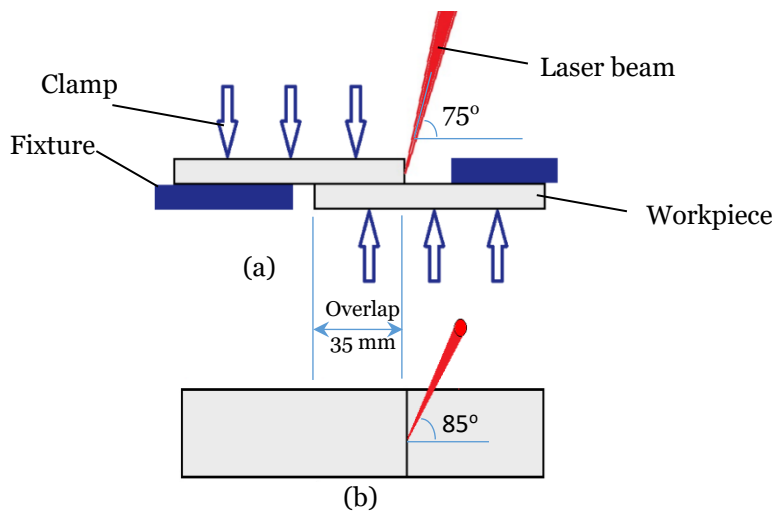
Single Fillet Lap Laser Welding Setup (not in Scale): (a) Side View, (b) Top View.
